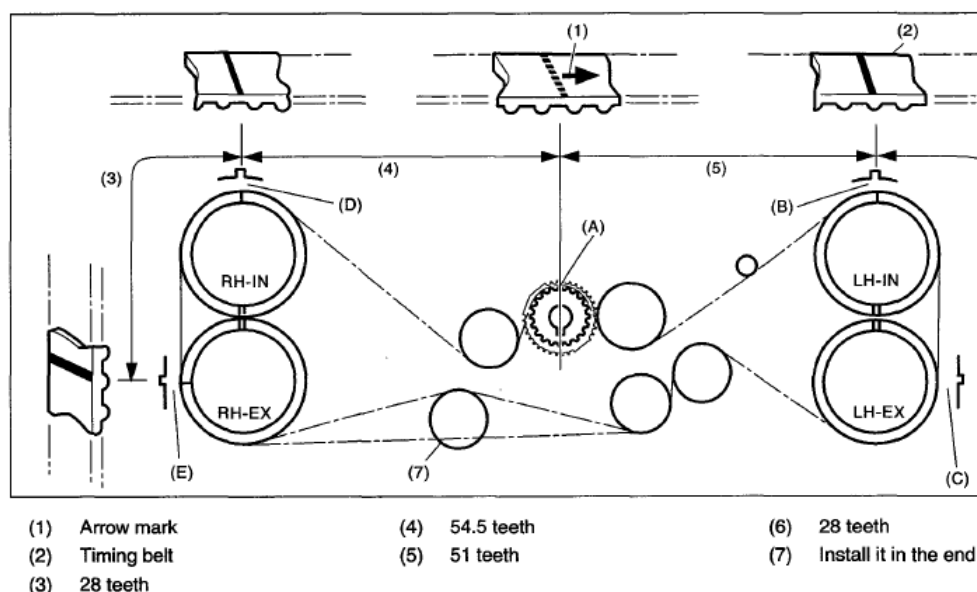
Identifying Alignment Mark On Timing Belt Check Points
